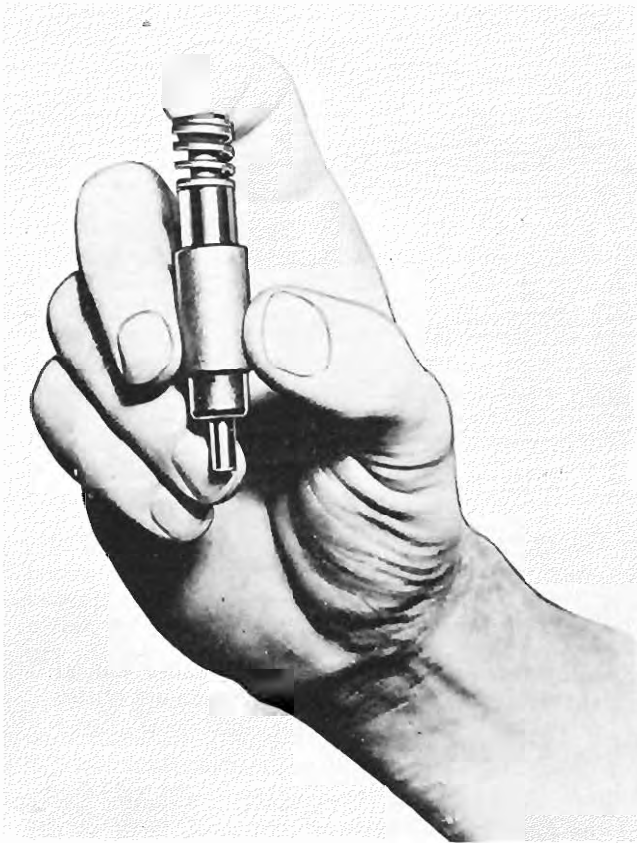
Checking Hydraulic Tappet Plunger and Cylinder Assembly for Leaks
